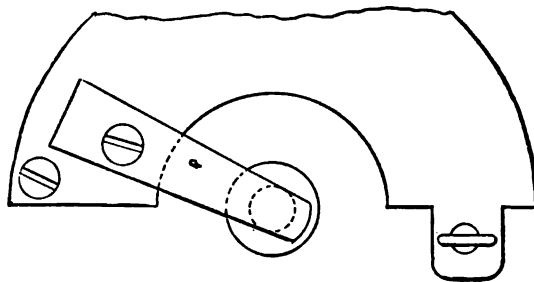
Hood Spring for B. & S. No. 2 Surface Grinder.
